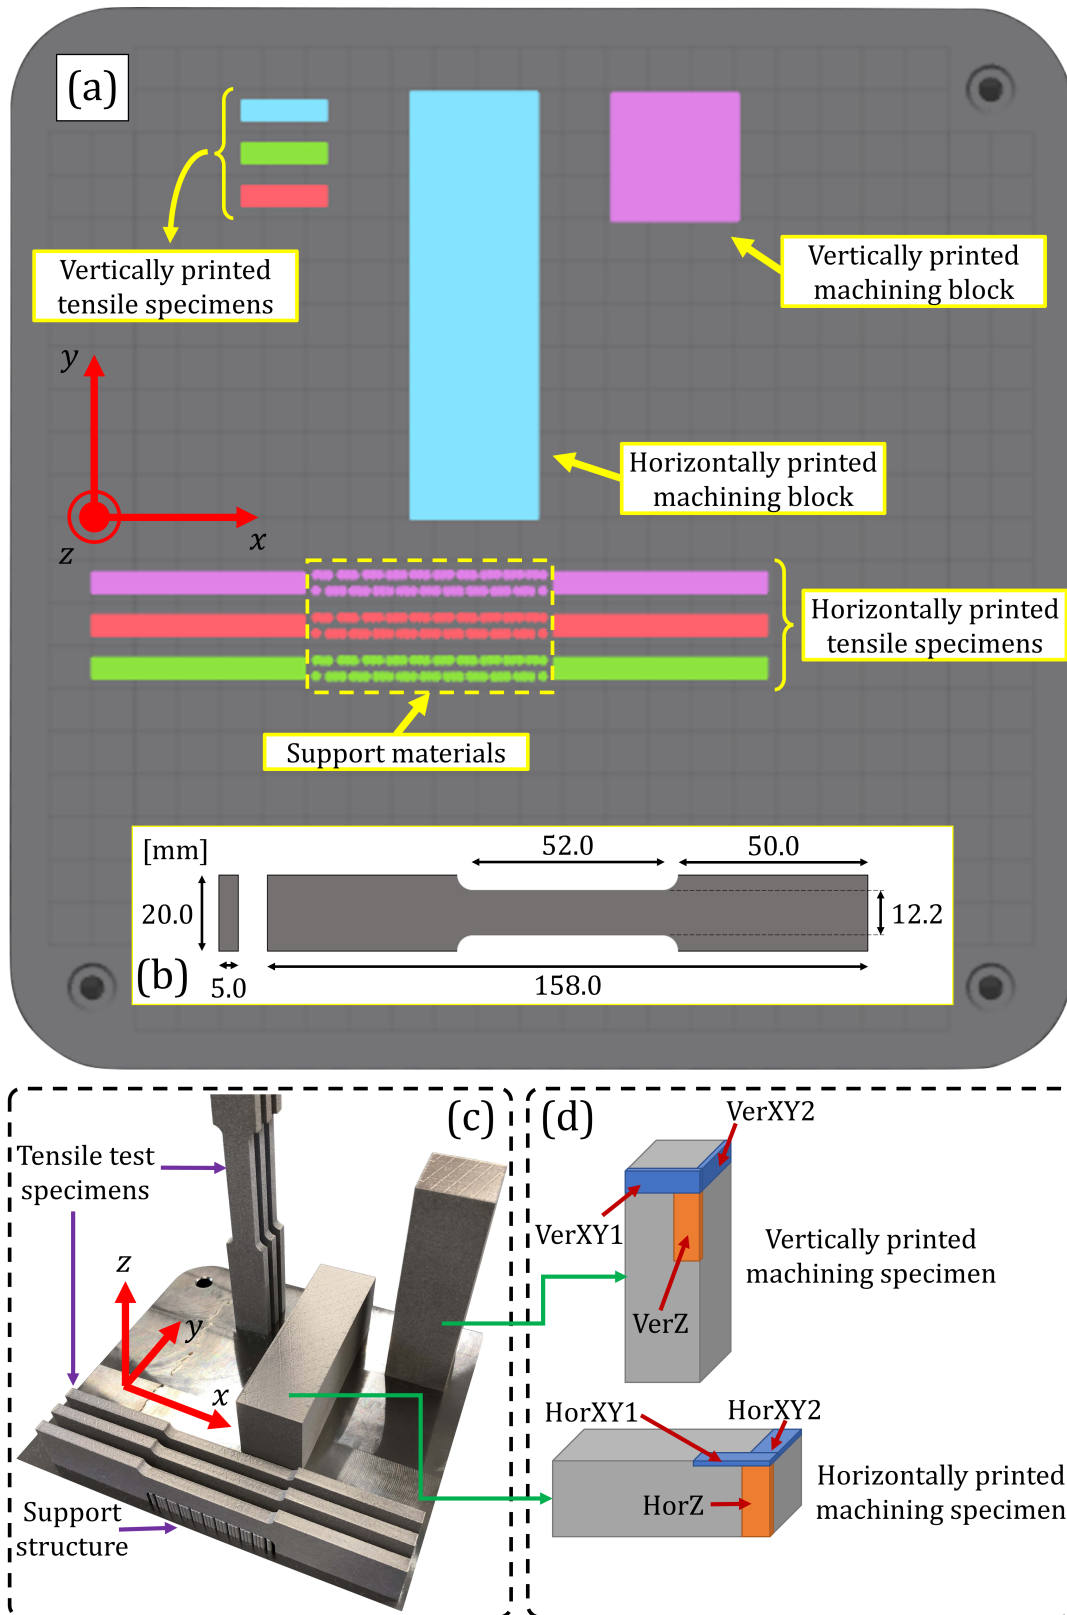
(a) Metal printing setup, (b) tensile test dimensions, (c) printed parts and (b) machining direction versus printing direction.
